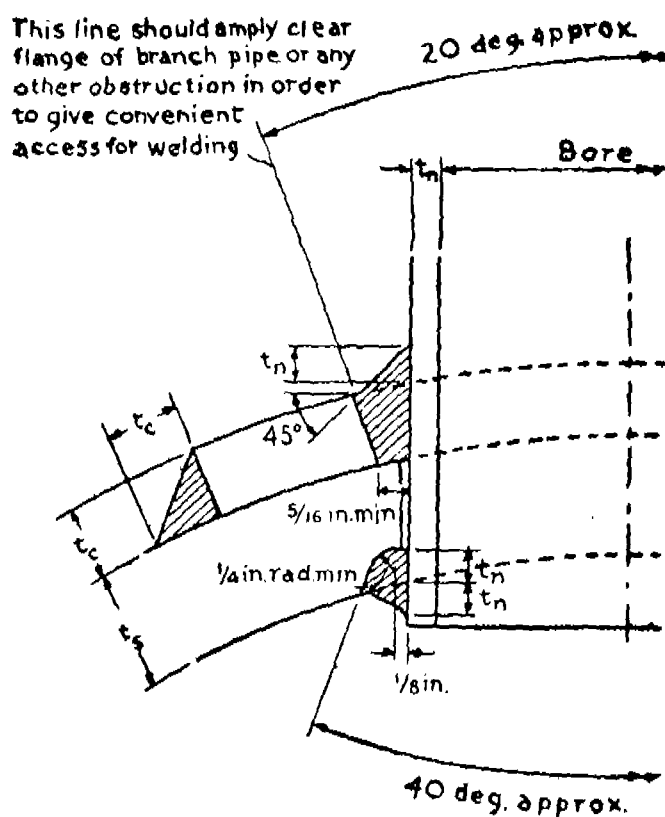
C Welded-in standpipe or branch with compensating ring for standpipes or branches up to and including 4 in. bore.
